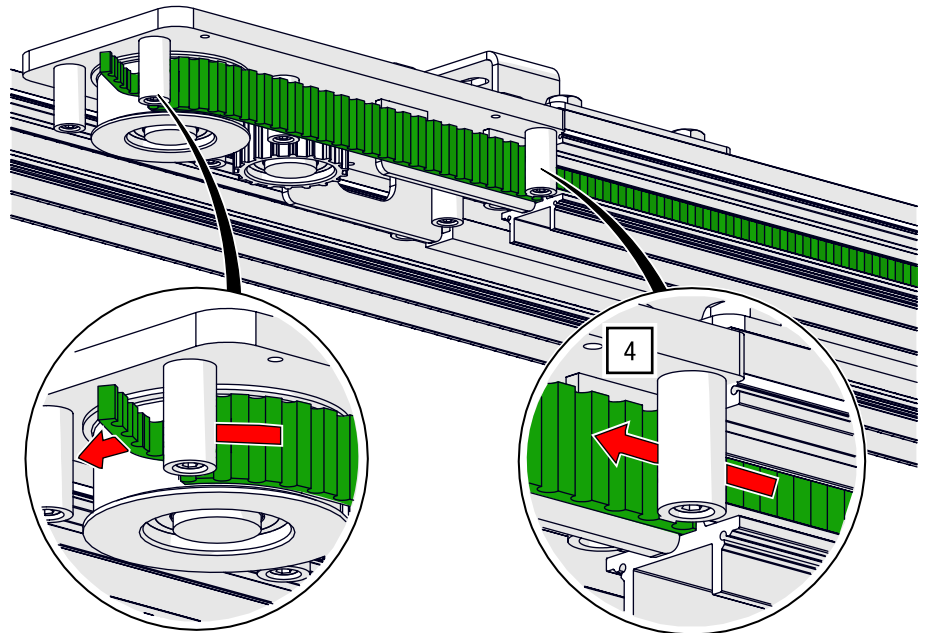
Timing belt installation – Threading timing belt through outer wheel on the deflection unit
